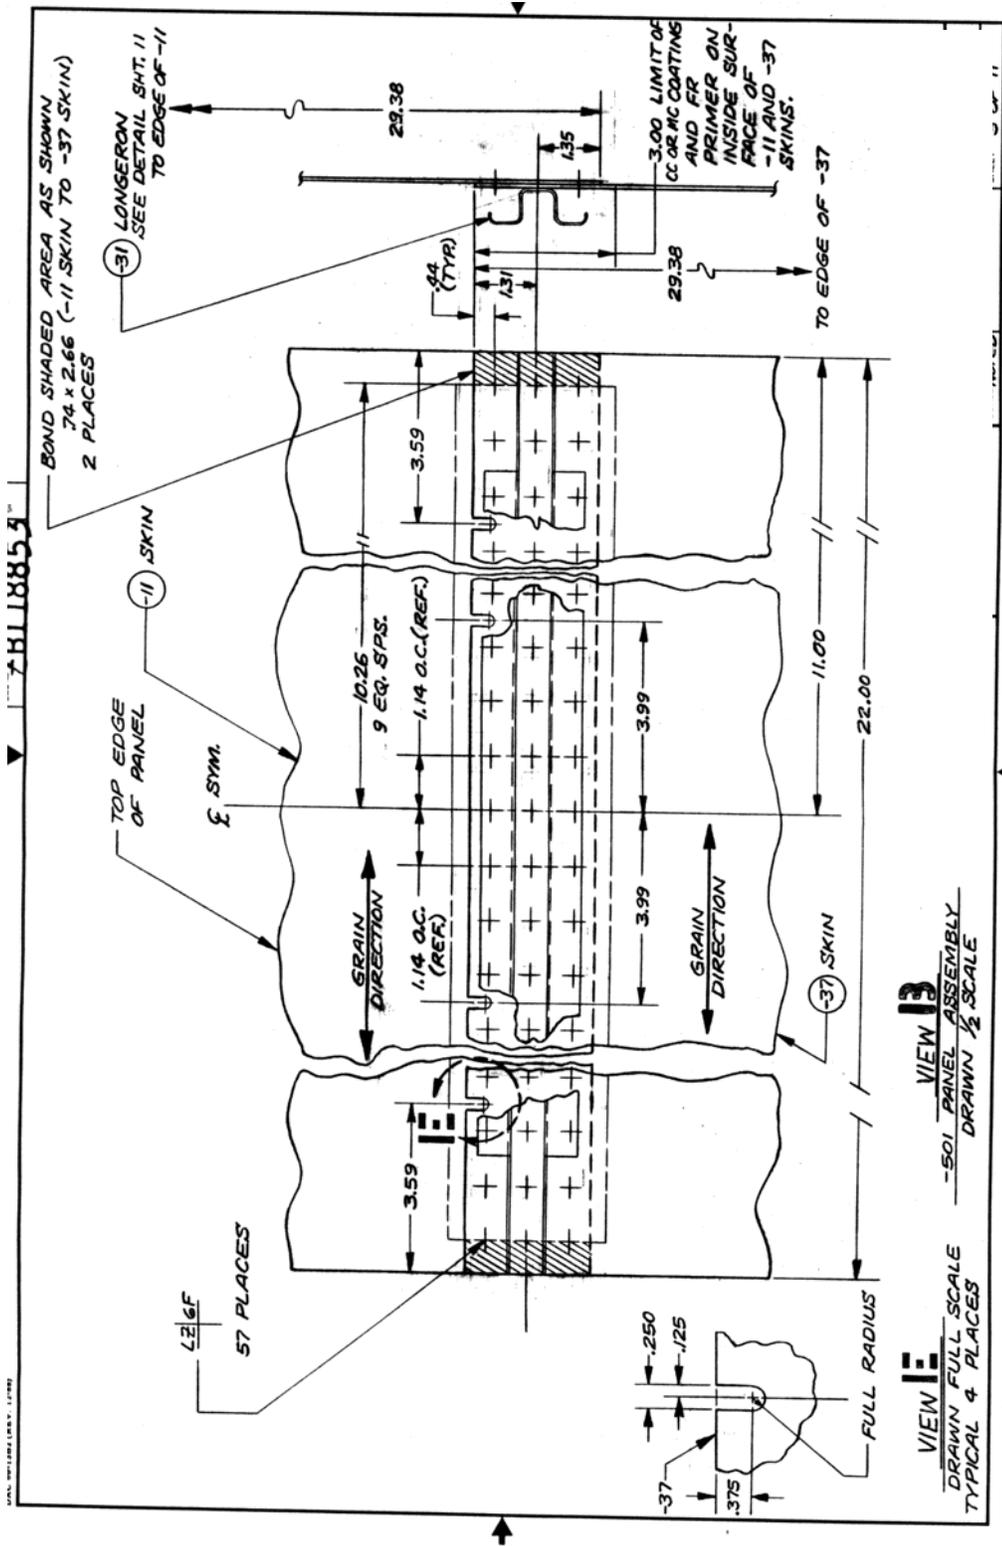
EQUIVALENT INITIAL FLAW SIZE PANEL ASSEMBLY DRAWINGS
